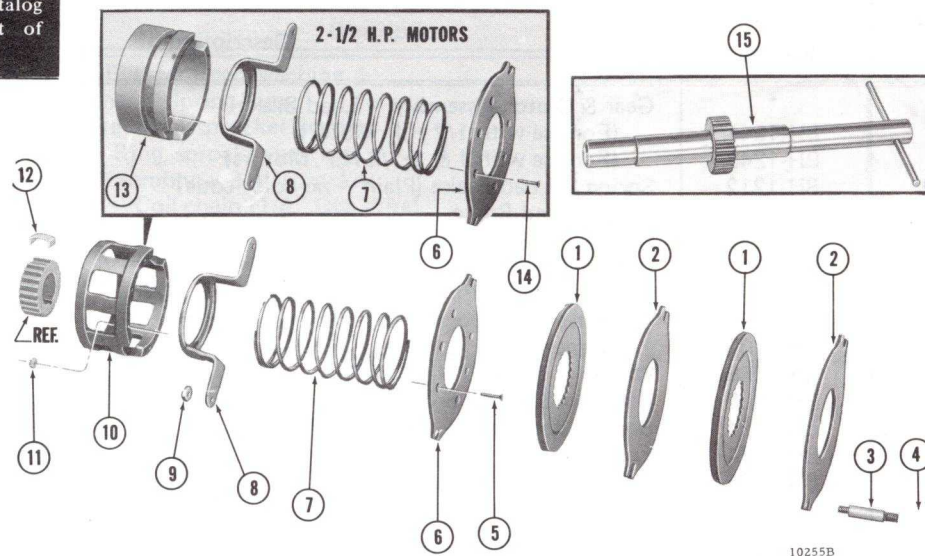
MAGNETIC MOTOR BRAKE PARTS
